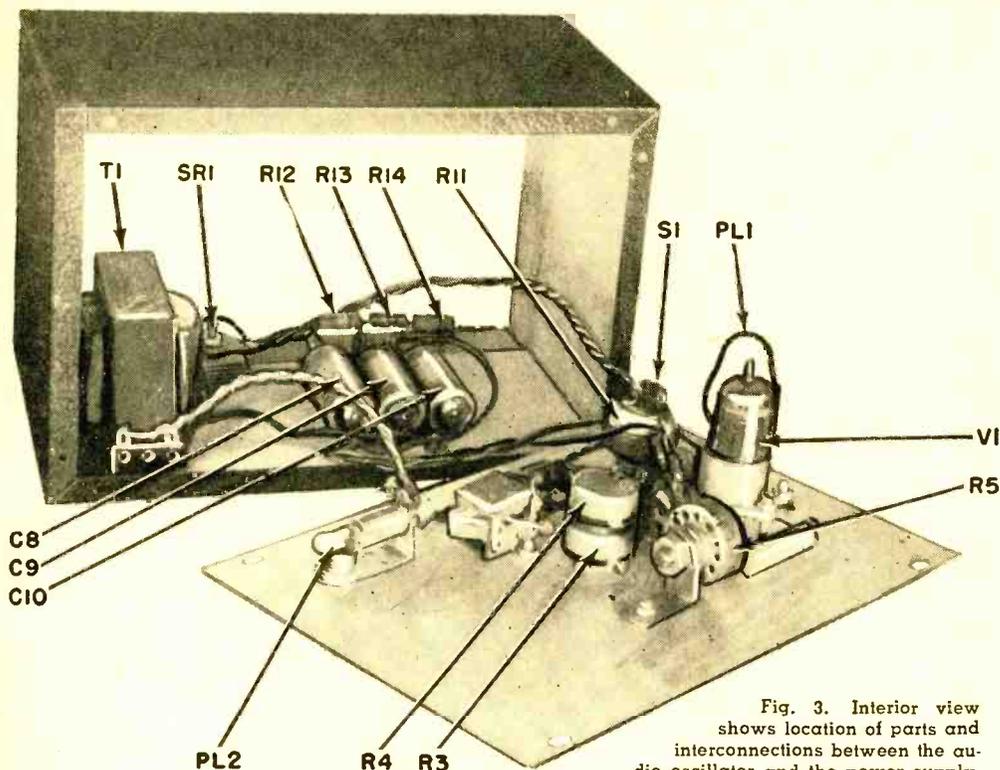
Interior view shows location of parts and interconnections between the audio oscillator and the power supply.
